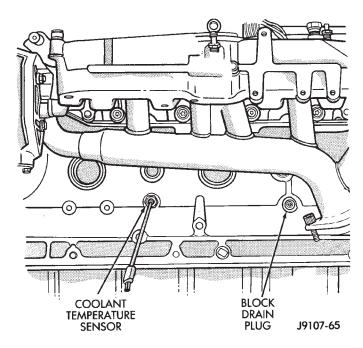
Draining Coolant—4.0L 6-Cylinder Engine
